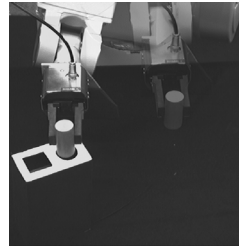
Vision-based approaching a cylindrical peg to a circular hole.
